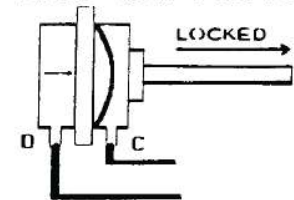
Axle Vacuum Shift Motor and Housing
